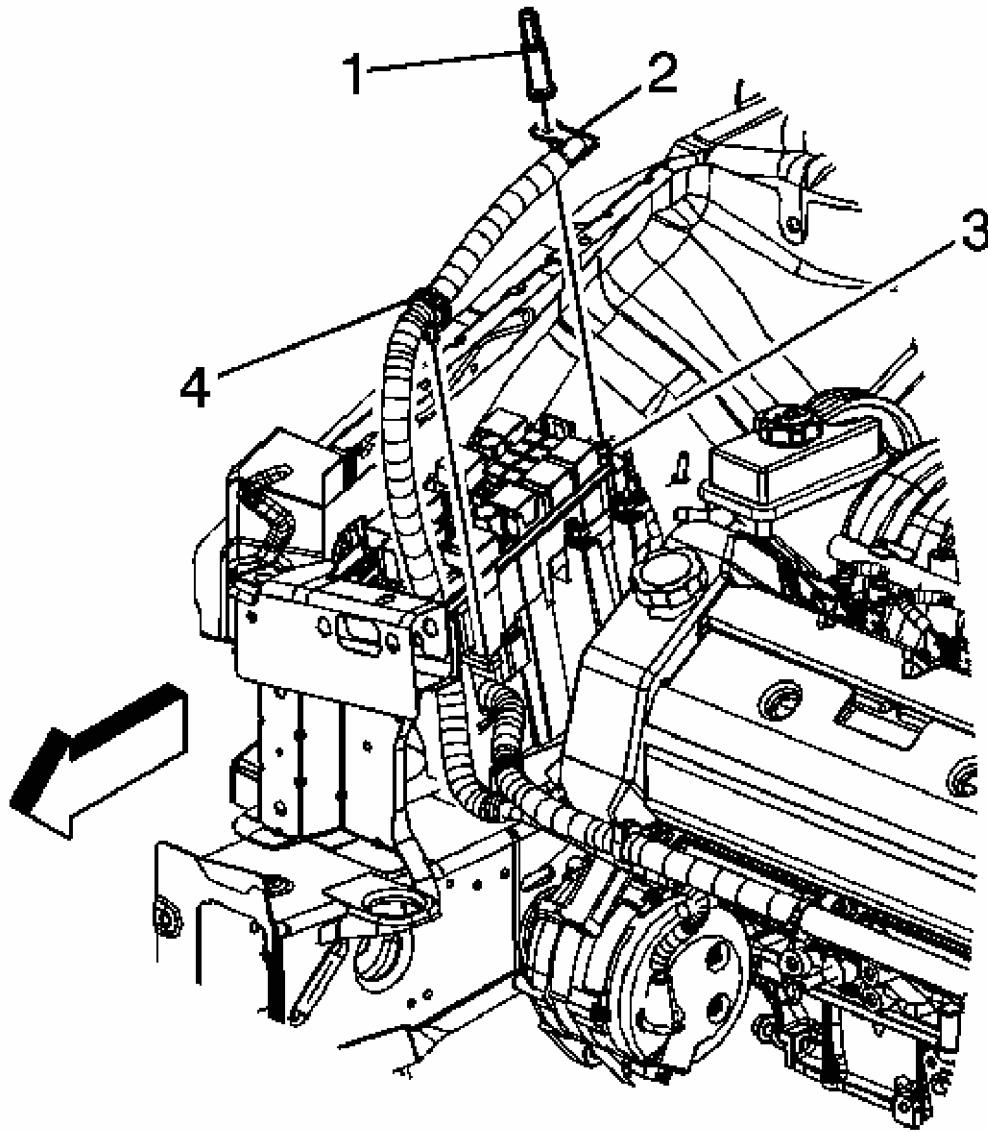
Identifying Starter Solenoid Cable To Bussed Electrical Center
